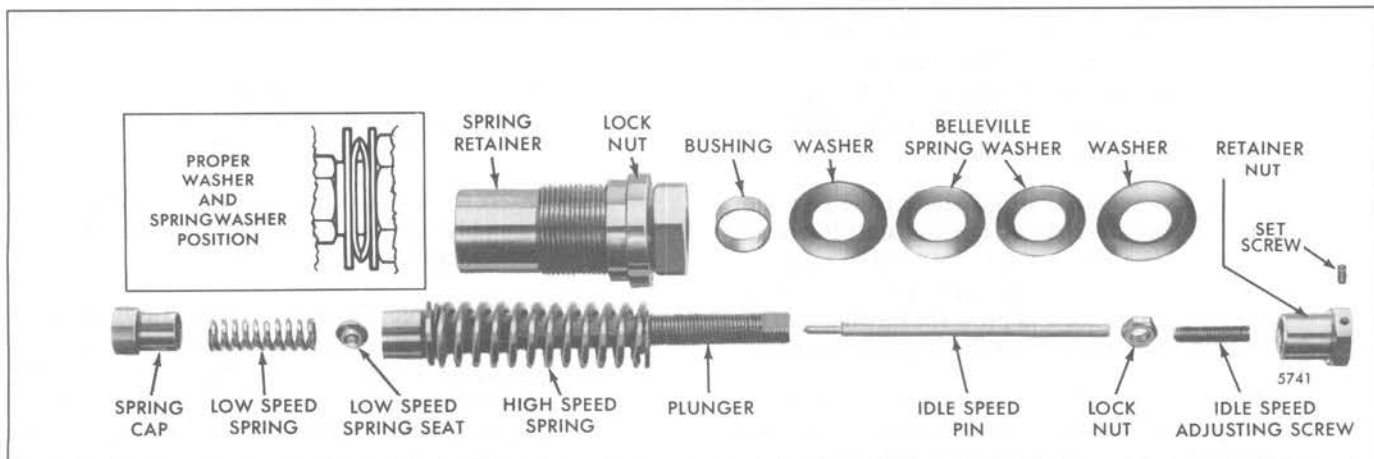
High and Low-Speed Springs and Plunger Details including Belleville Washers (Fuel Squeezer Engines)
